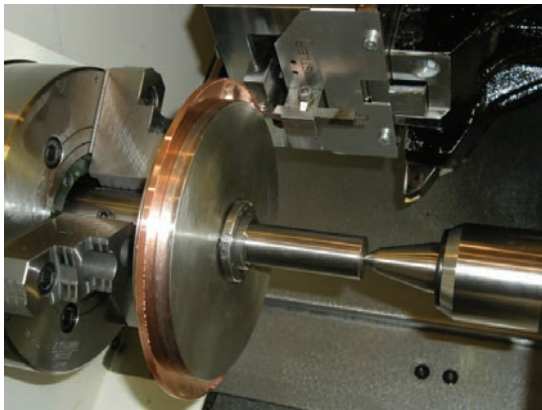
Experimental setup for extrusion-cutting on CNC lathe.
